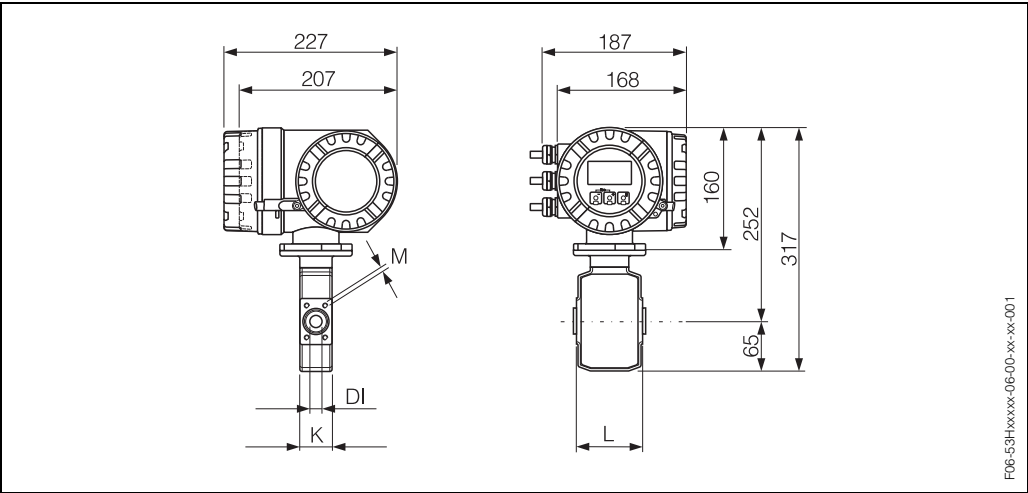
Dimensions Promag H / DN 2...25 (compact version, aluminum field housing)
